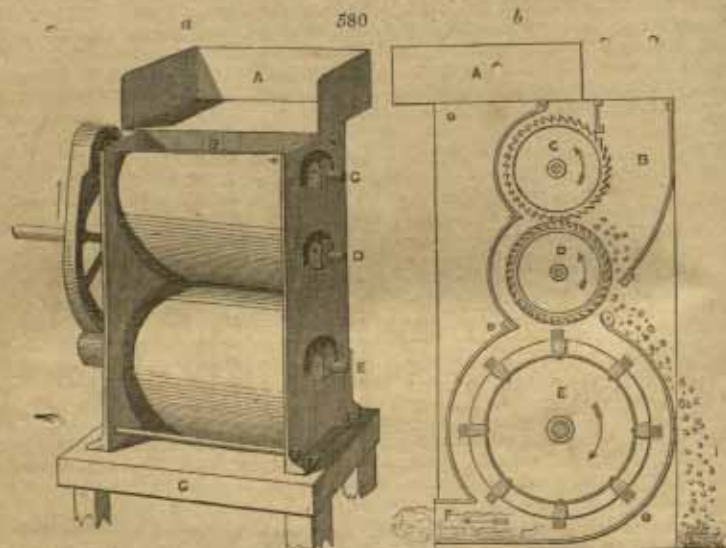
is F. A. Calvert's patent toothed roller cotton gin.
